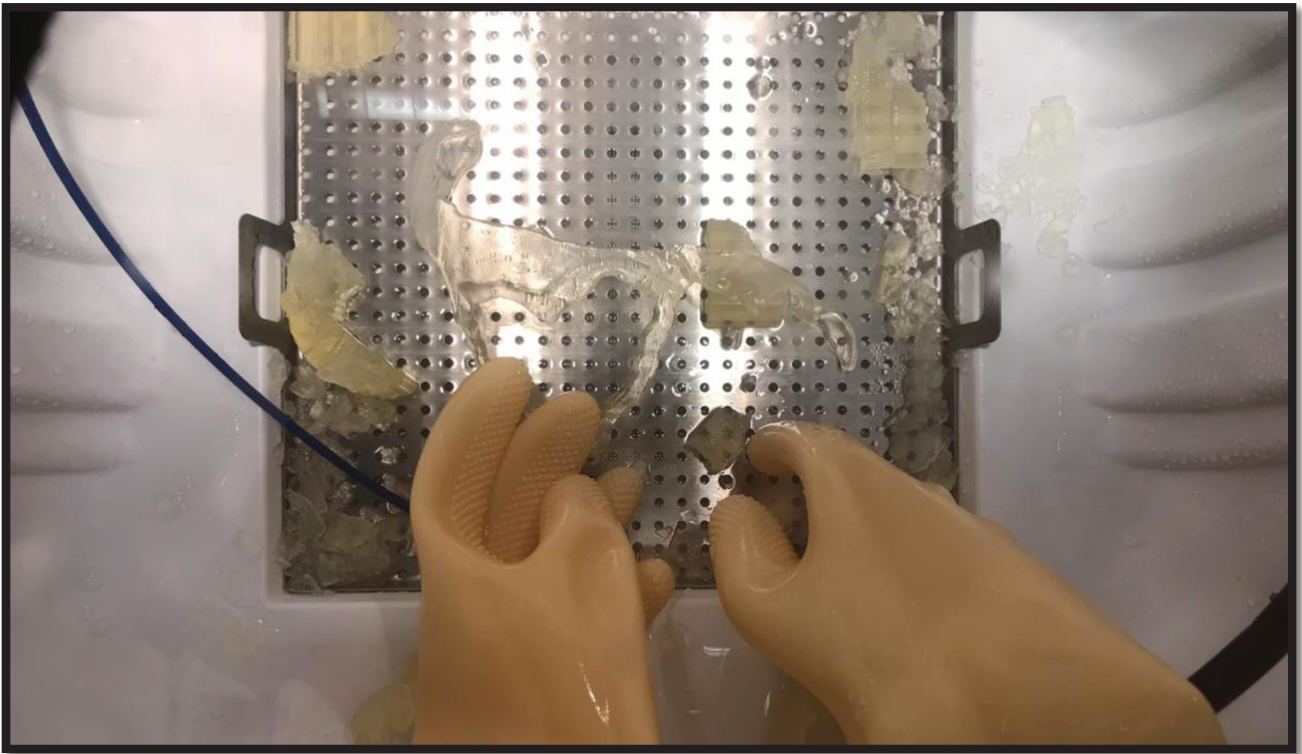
The 1st prototype of surgical guide during cleaning in Waterjet to remove the support material.
